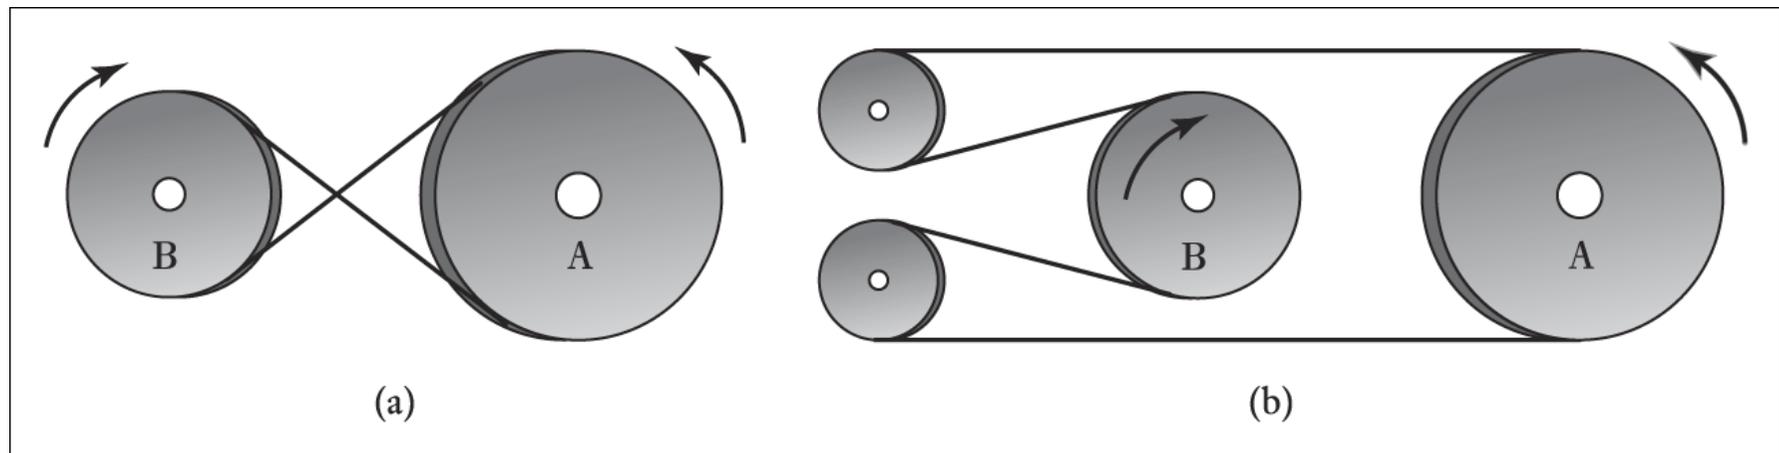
Reversed belt drives: (a) crossed belt, (b) open belt
